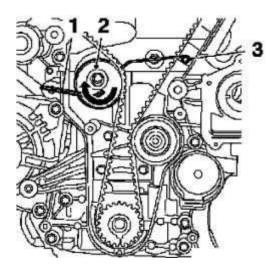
Removing toothed belt: 1 - Allen Key 2 - toothed belt tension roller, 3 - special tool
